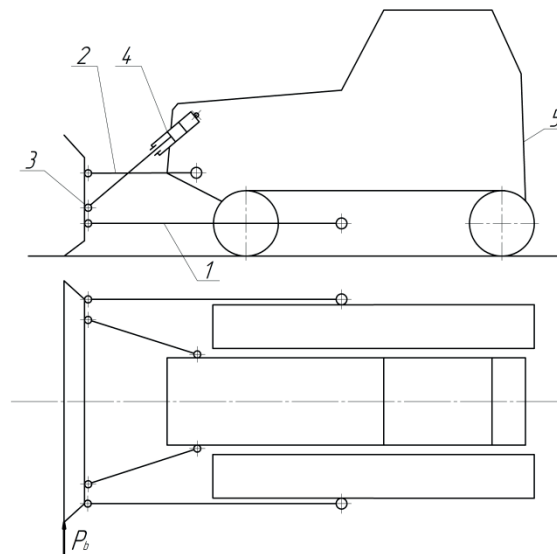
Kinematic diagram of bulldozer working equipment: 1 - push bar; 2 – strut; 3- moldboard; 4 - hydraulic cylinder; 5 - tractor base
